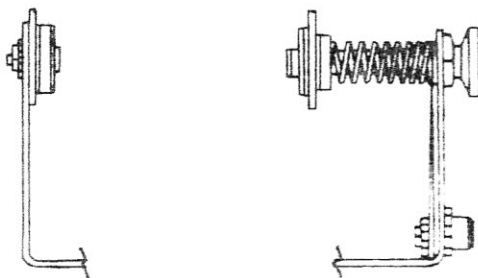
Paper Roll Bracket for 8½" or 210 mm, 1" Core Roll, with Washer
